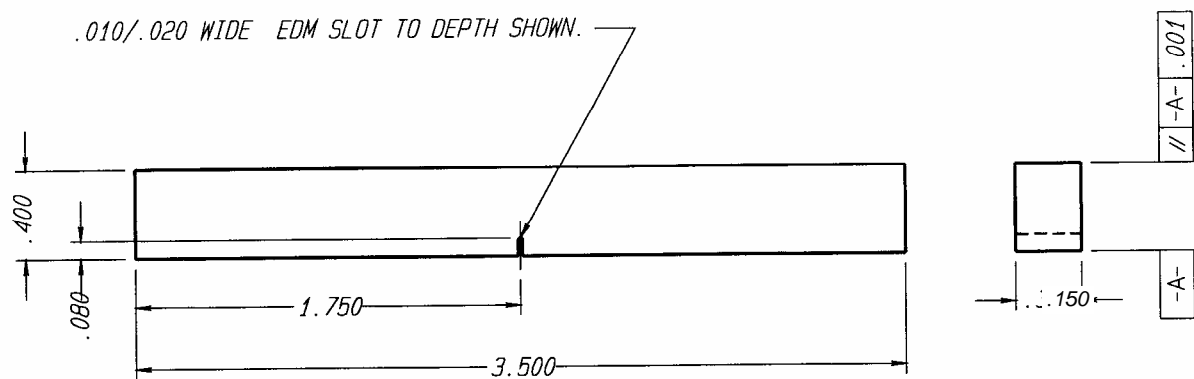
Dimensions of the AFPB crack specimen for mixed-mode fatigue crack growth testing of PWA 1484 at elevated temperature. All dimensions in inches.
